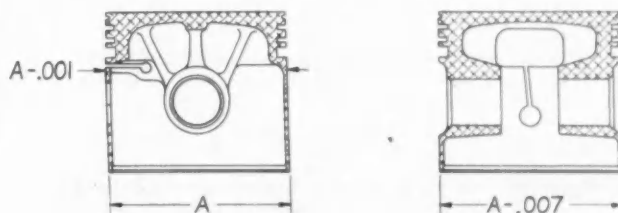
For a given clearance, a rod can tip less with the bearing in the piston than with the bearing in the rod
